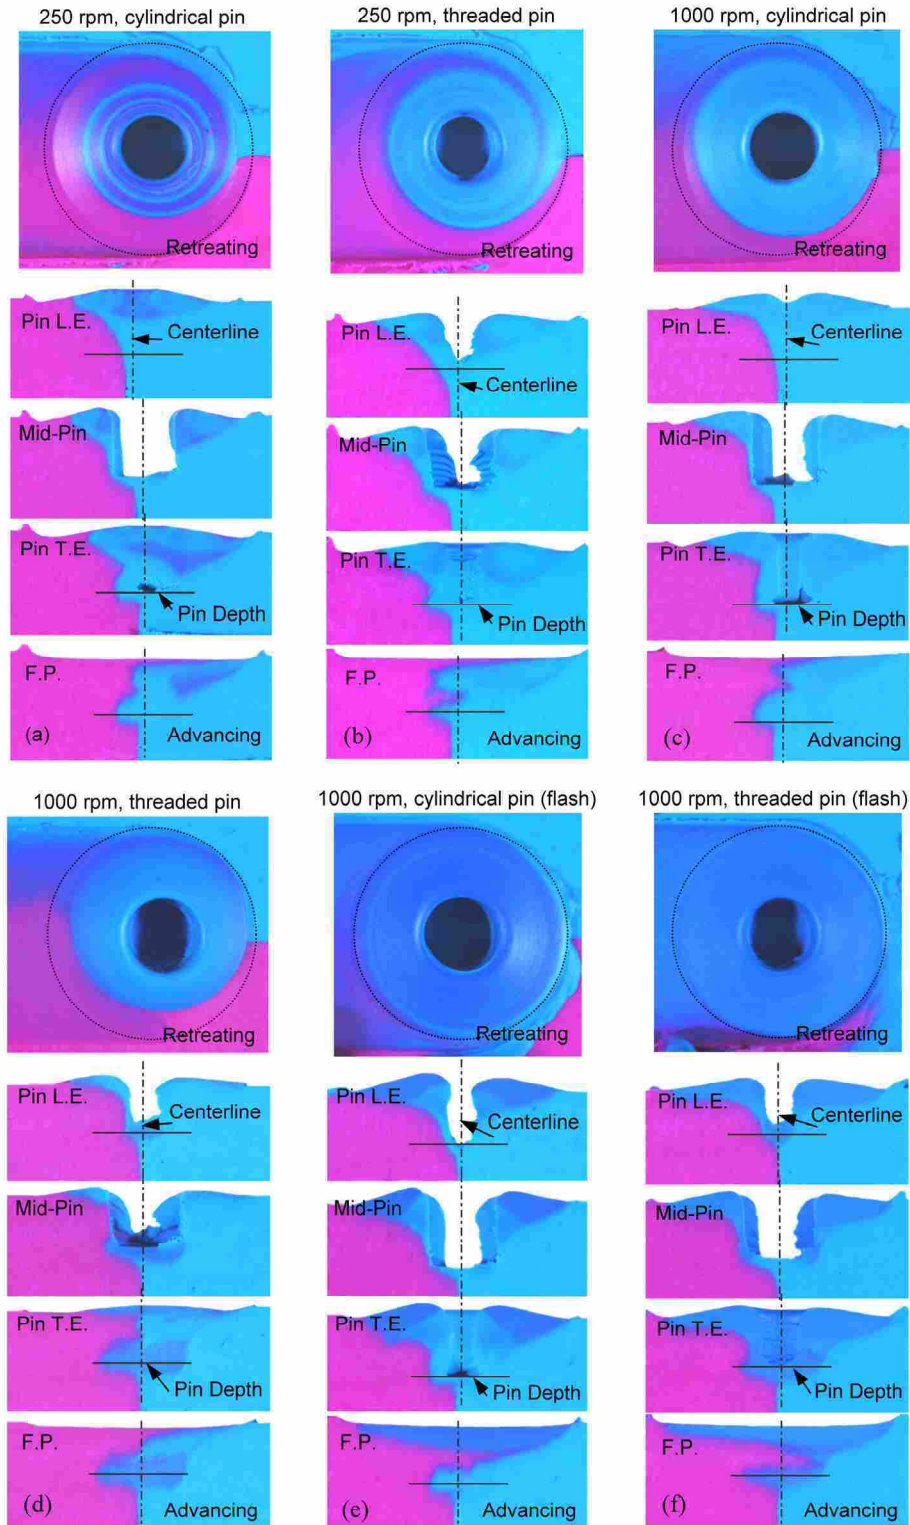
Butt welds at various operating conditions (1.1 mm/s feed-rate). For each operating condition a horizontal section is provided of the weld surface along with several transverse cross-sections around the extracted pin location.
